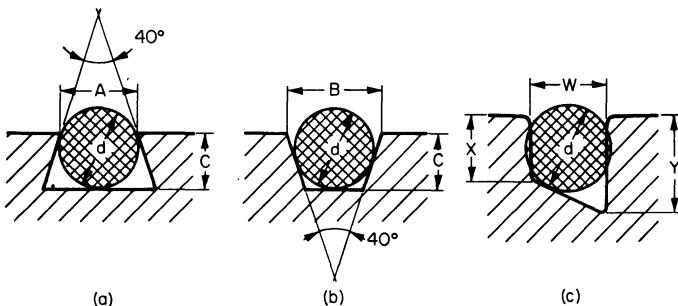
Trapezium grooves: (a) dovetail; (b) open trapezium; (c) trapezium with parallel walls
